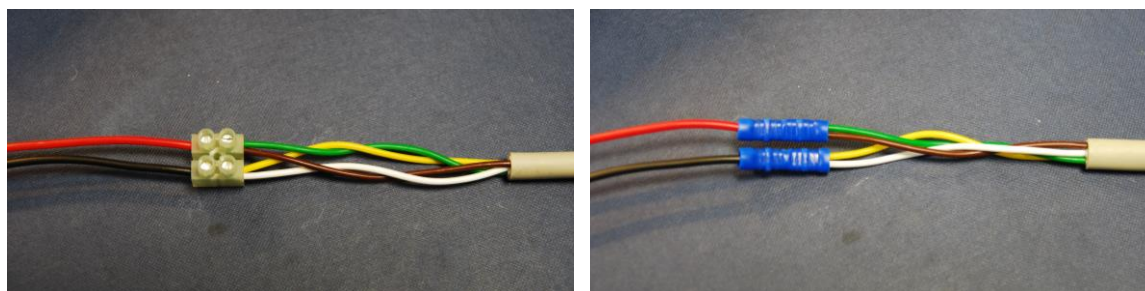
Cable to PSU wiring, terminal block (left), crimps (right)
